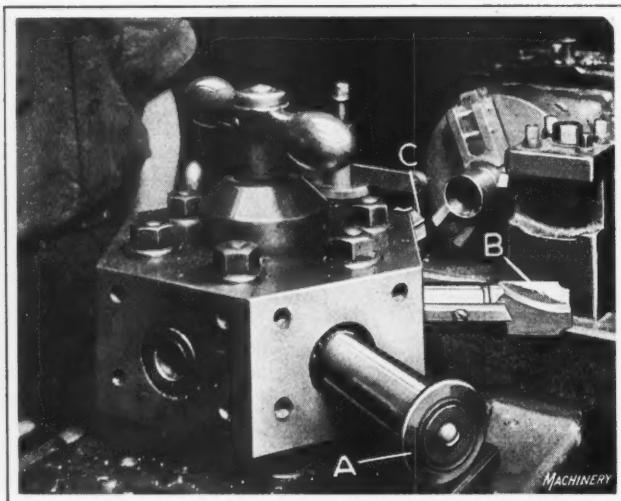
Turret Lathe used in making Sockets for Vacuum Tubes
